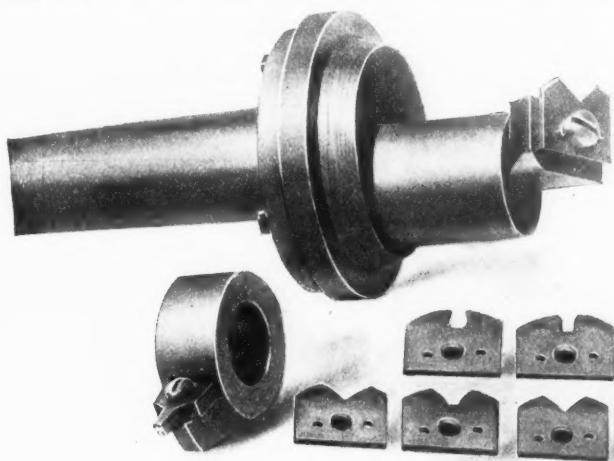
Chuck, Fly-cutter, and Pieces milled in Experiments Described.
